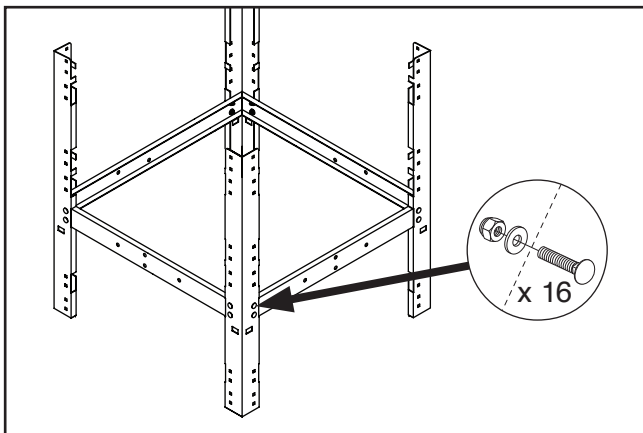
Initial assembly of upper stand legs connected to lower stand braces.
